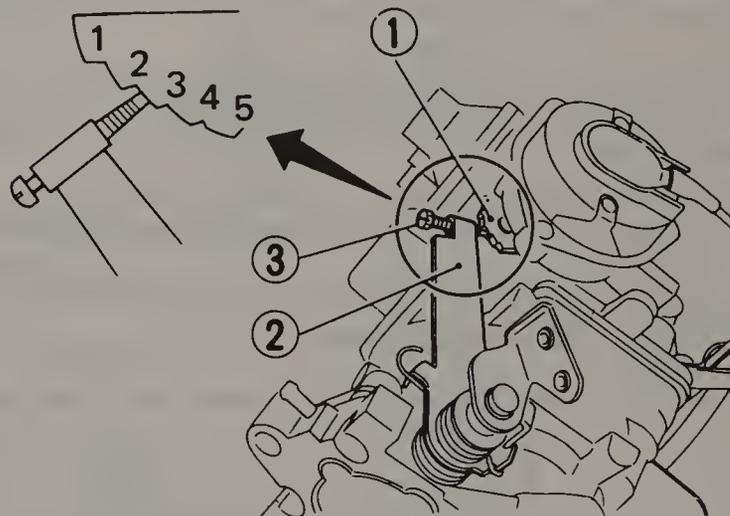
Fast idle adjustment (Carter/Weber) (Sec 14)
